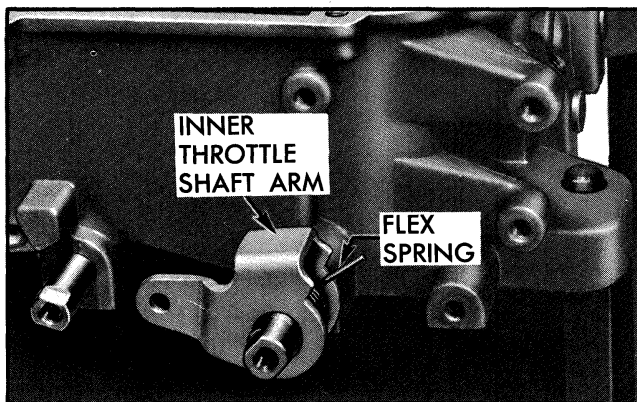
B-88 Inner Throttle Shaft Arm and Flex Spring Installed
